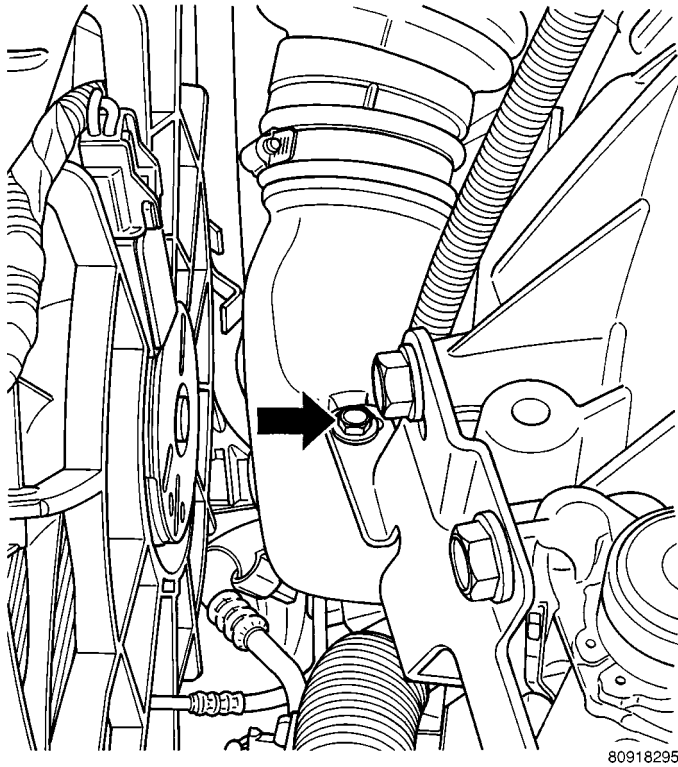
Lower Manifold Support Bolt - (Under-body View)
